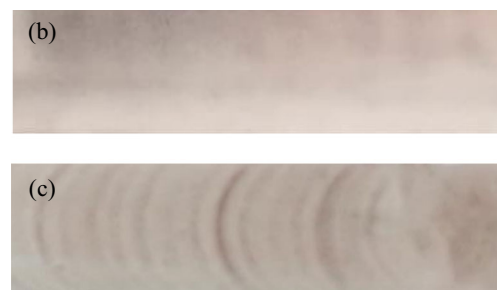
Machined surface of the workpiece during b stable milling and c chatter
